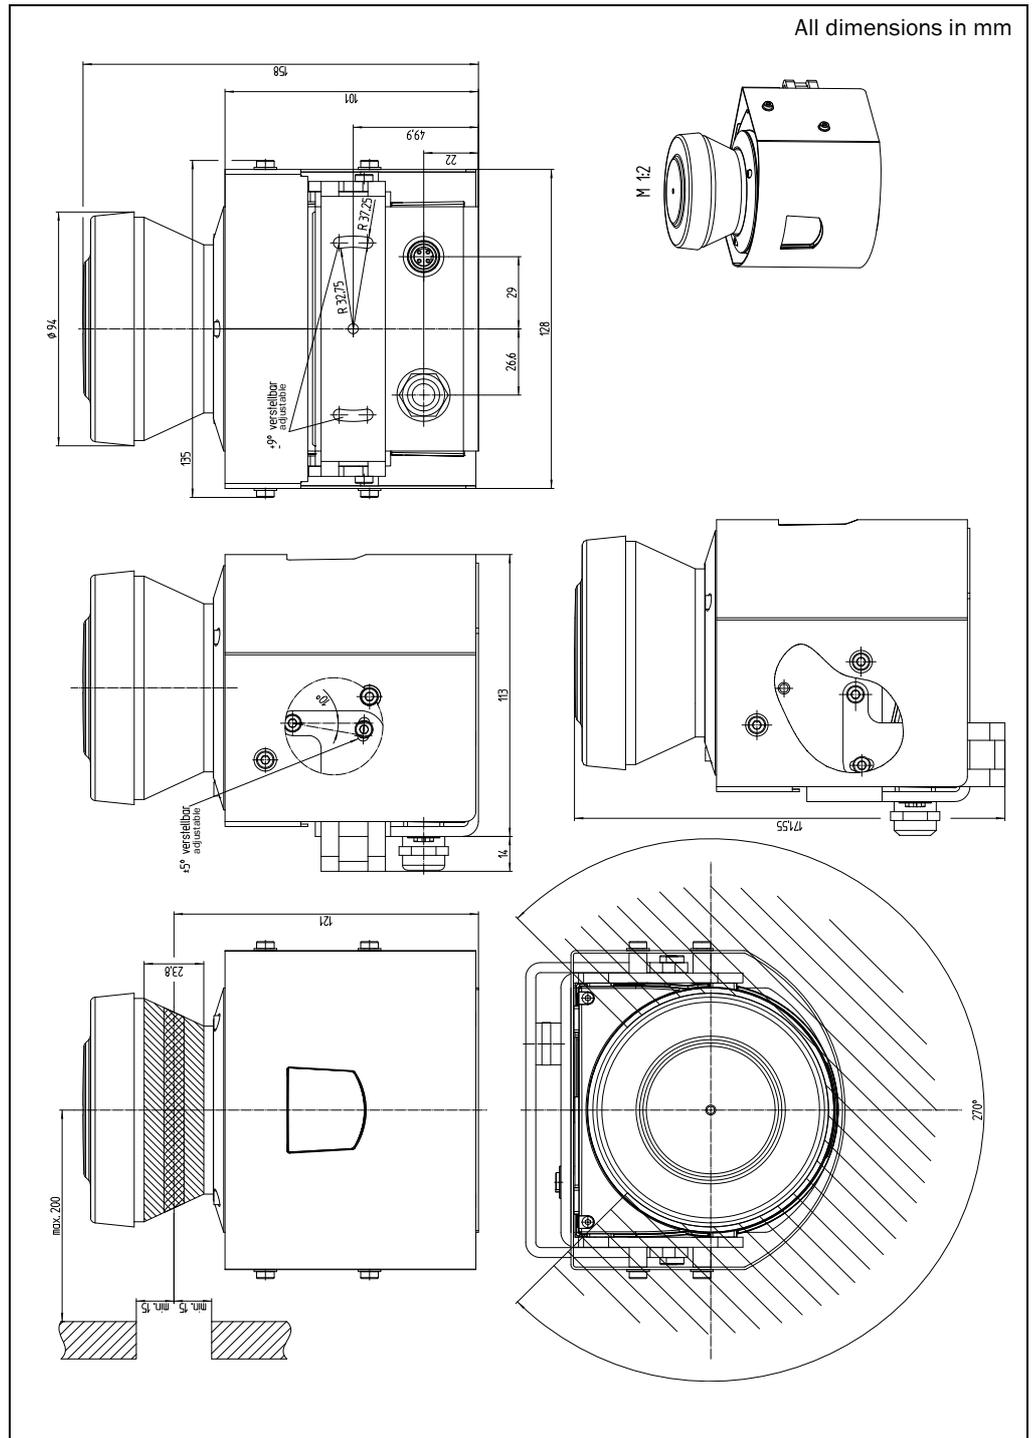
Dimensional drawing LMC12x with VdS mounting kit 1
